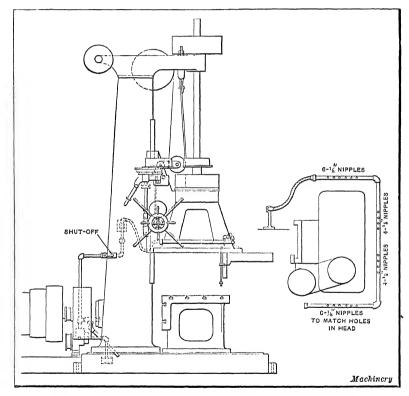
System of distributing Coolant on Multiple-spindle Drilling Machine
